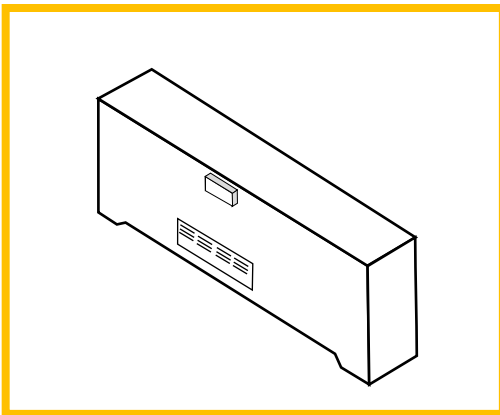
A front view of the enclosure with the front grille for air intake and clamshell control module affixed. Note the clamshell control module does not need to be in the center.
